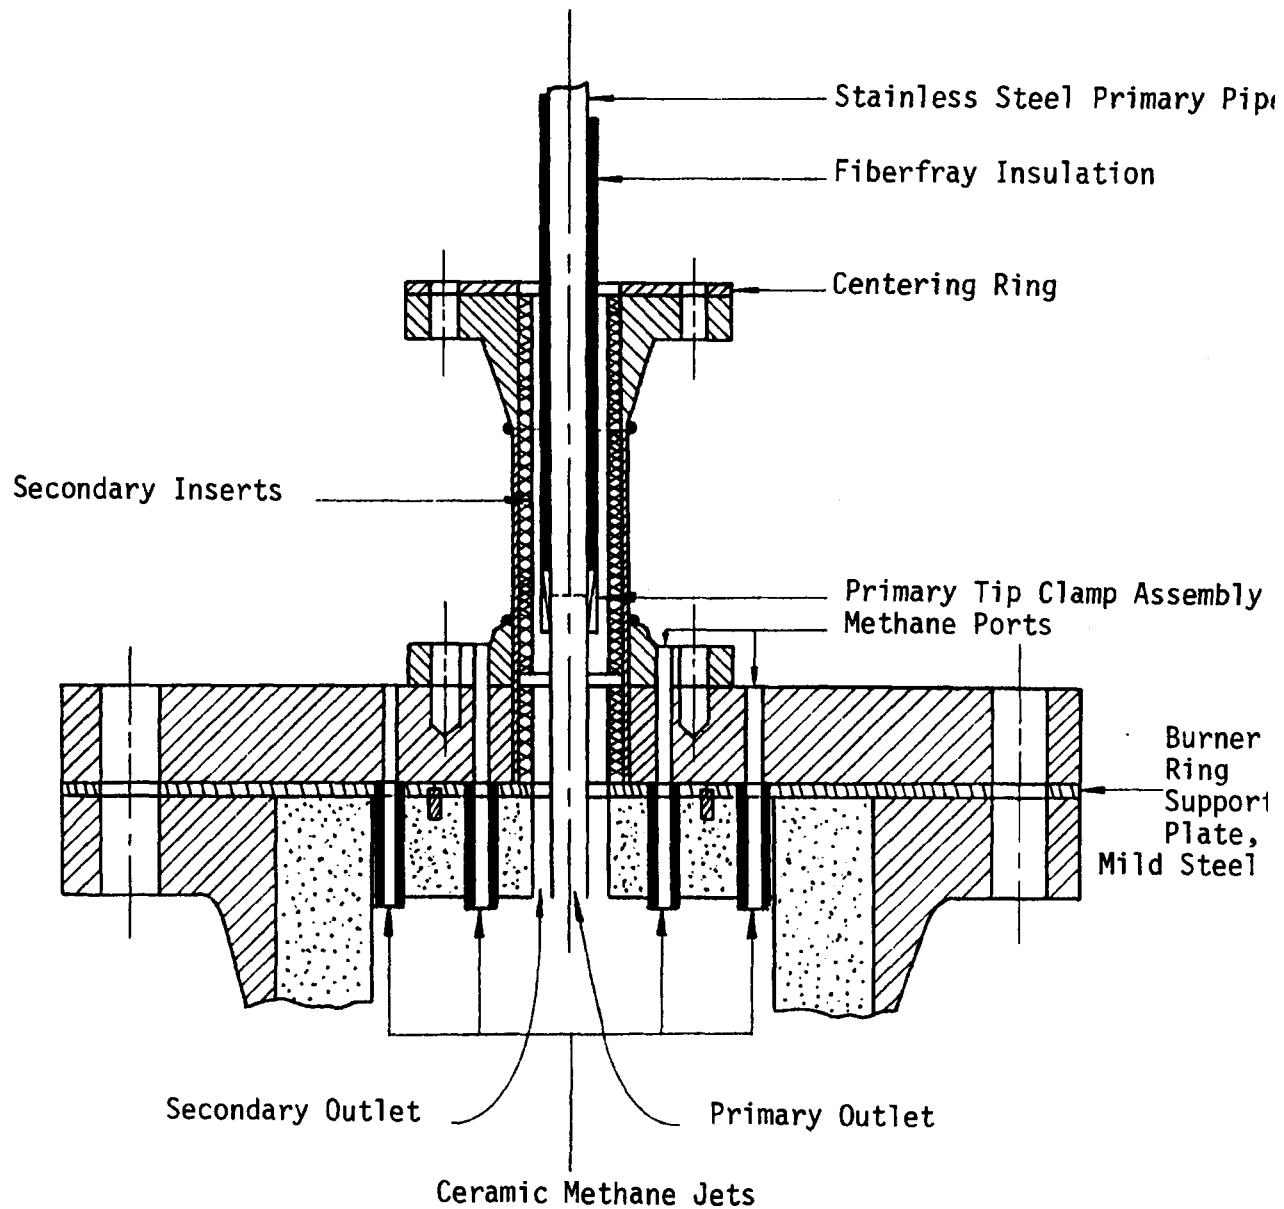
Gasifier Reactor Top Plate and Primary/Secondary Assembly.
